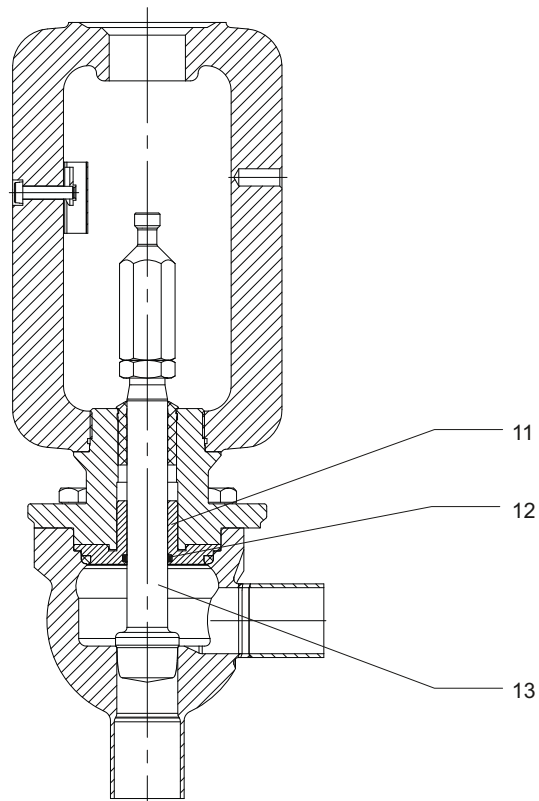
Valve, version with special sealing system for media that crystallize or tend to form deposits
